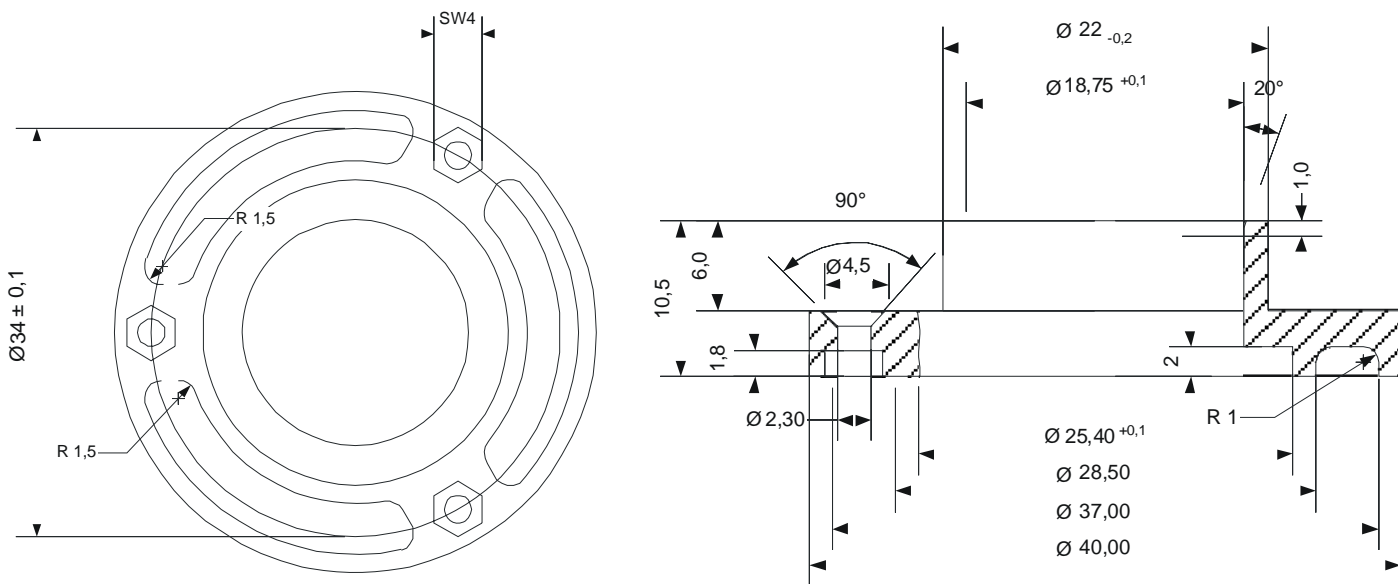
Sensor Fixing Ring (Blue) Dimensions
